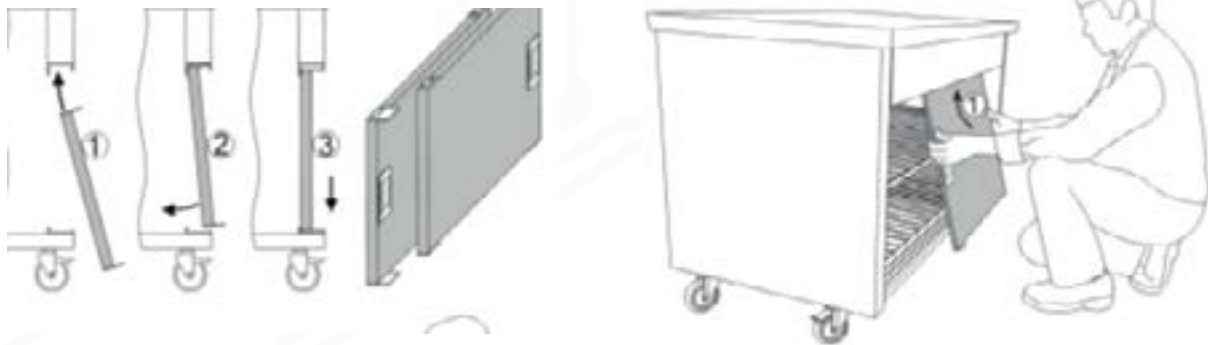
demonstrates the fitting of the cupboard doors; in this case, the rear door (Door A).
